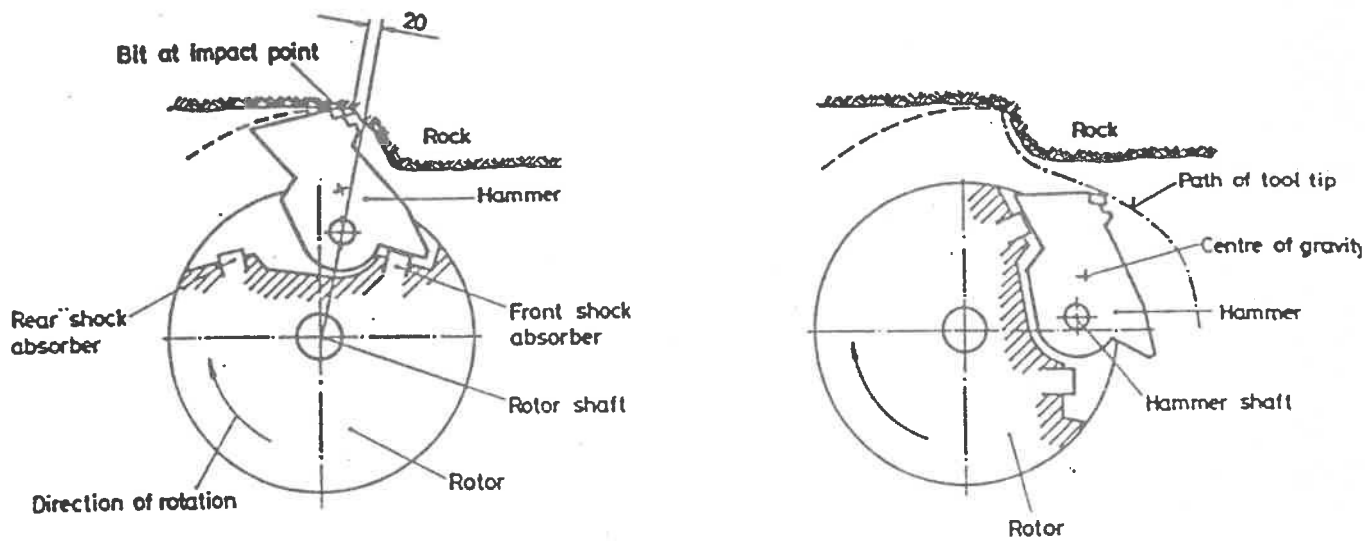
HAMMER ACTION OF THE SWING HAMMER MINER
